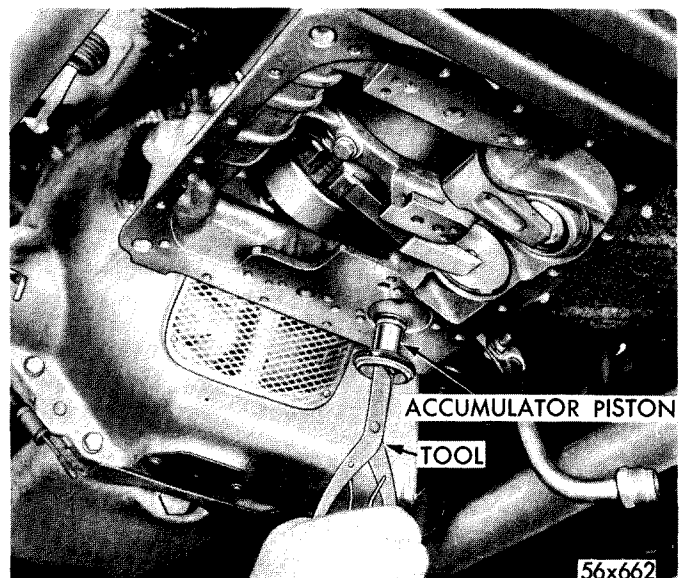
Removal and Installation of Accumulator Piston (Typical View)
